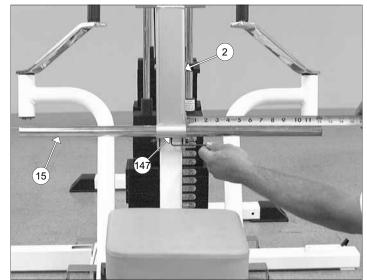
Next, insert the Foot Roll Tube 1 X 27 (#15) into the receptacle of the Adjustable Back Pad Bracket (#2). Use a measuring tape to center the Foot Roll Tube 1 X 27 (#15) to the Adjustable Back Pad Bracket (#2). Next, secure the Foot Roll Tube 1 X 27 (#15) to the Adjustable Back Pad Bracket (#2) using one Set Screw 1/4-20 X 1/4 (#147).
